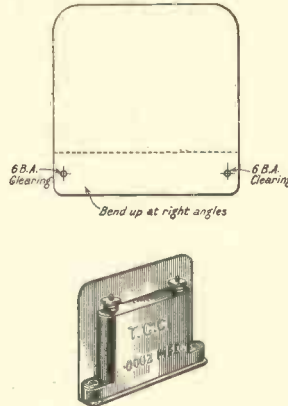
DETAILS OF THE SHIELD FOR COUPLING CONDENSER, ALSO THE METHOD OF ASSEMBLING THE SHIELD.
